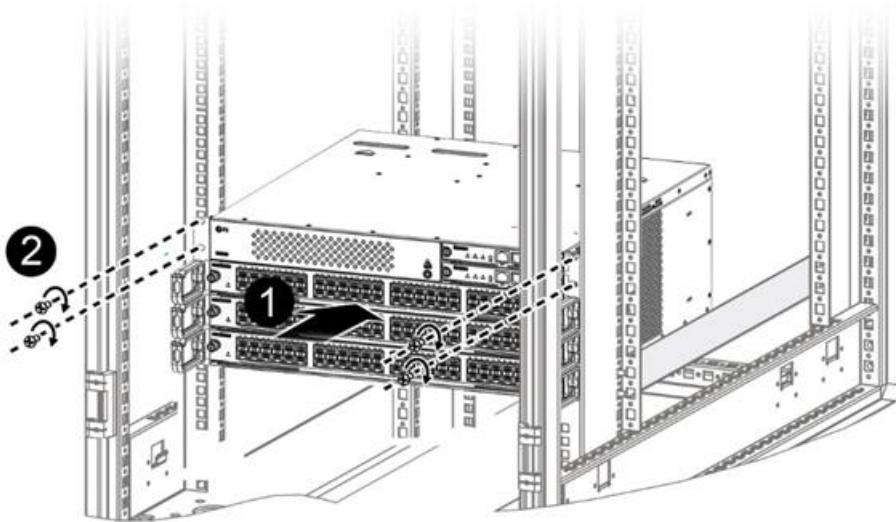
SC9405 Cable Tray Installation Schematic Diagram
